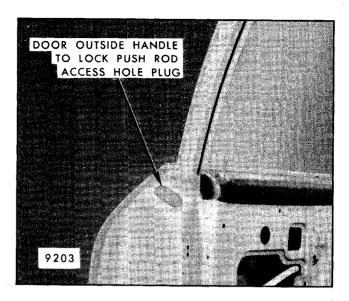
Outside Handle Push Rod Access Hole Plug - H Styles
